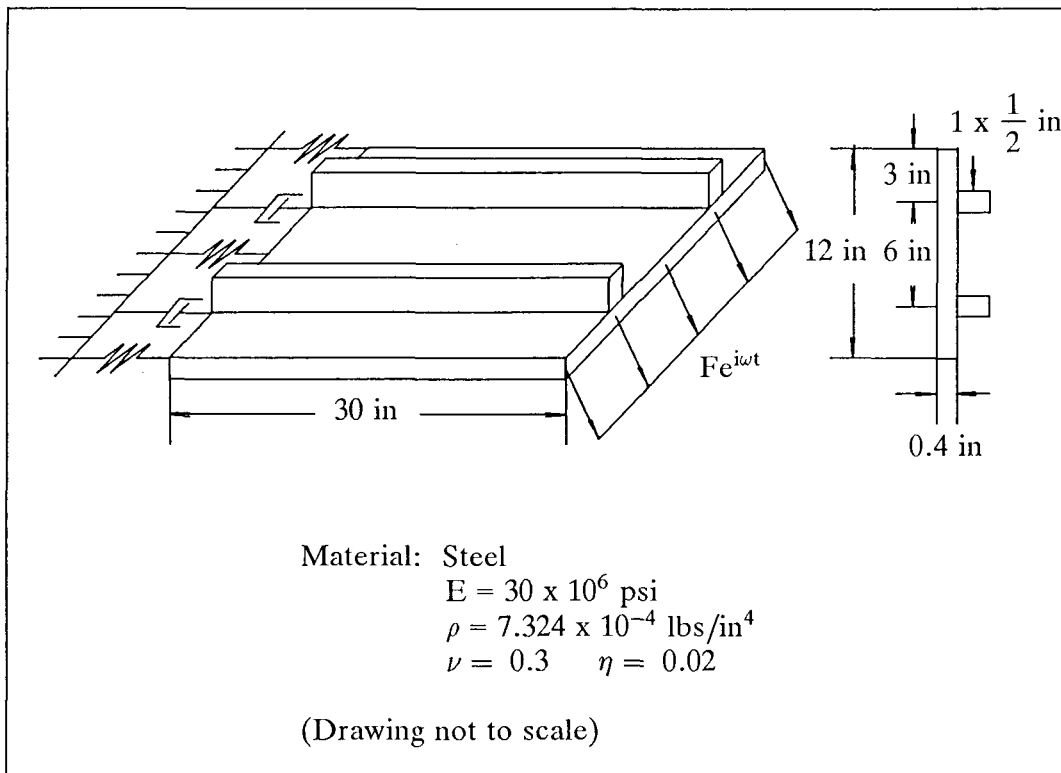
Beam-Stiffened Cantilever Plate Problem
